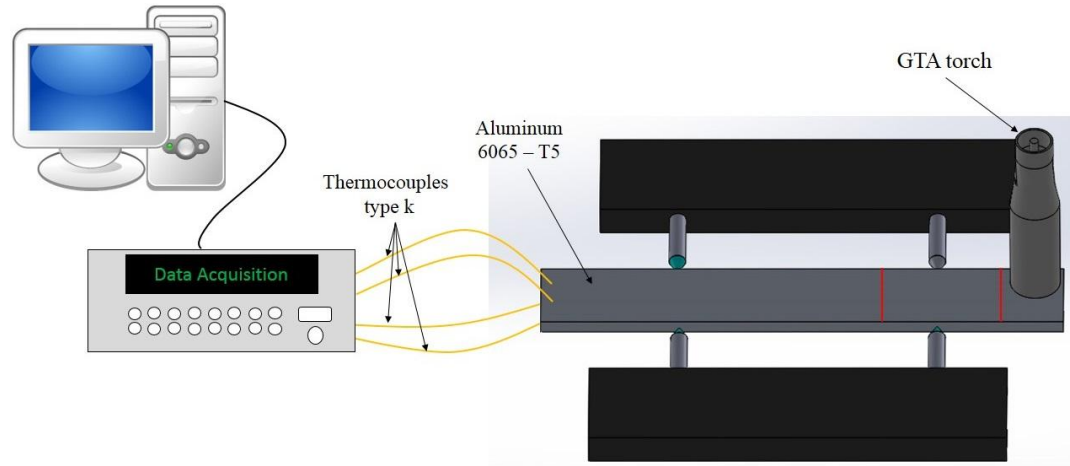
Experimental assembly with the position of the thermocouples and the marks indicating the beginning and end of the welding process on the aluminum plate.
